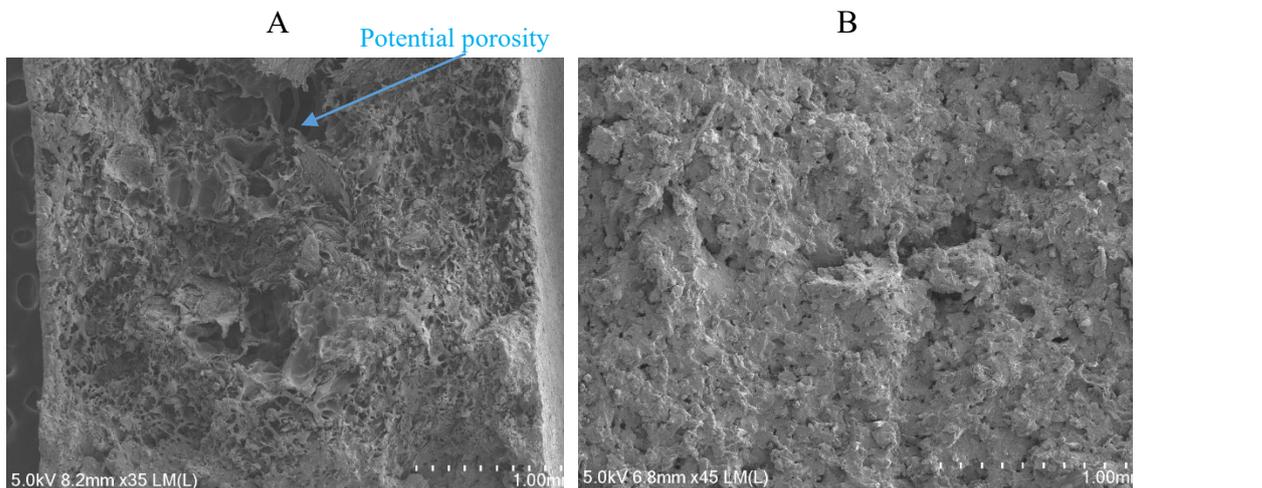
Low magnification scanning electron microscopy of digested fibre composite failure surfaces produced with: A) Extruder B) Sigma blade.
